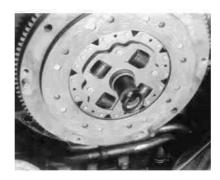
Clutch plate and pressure plate installed with the alignment arbor in place
